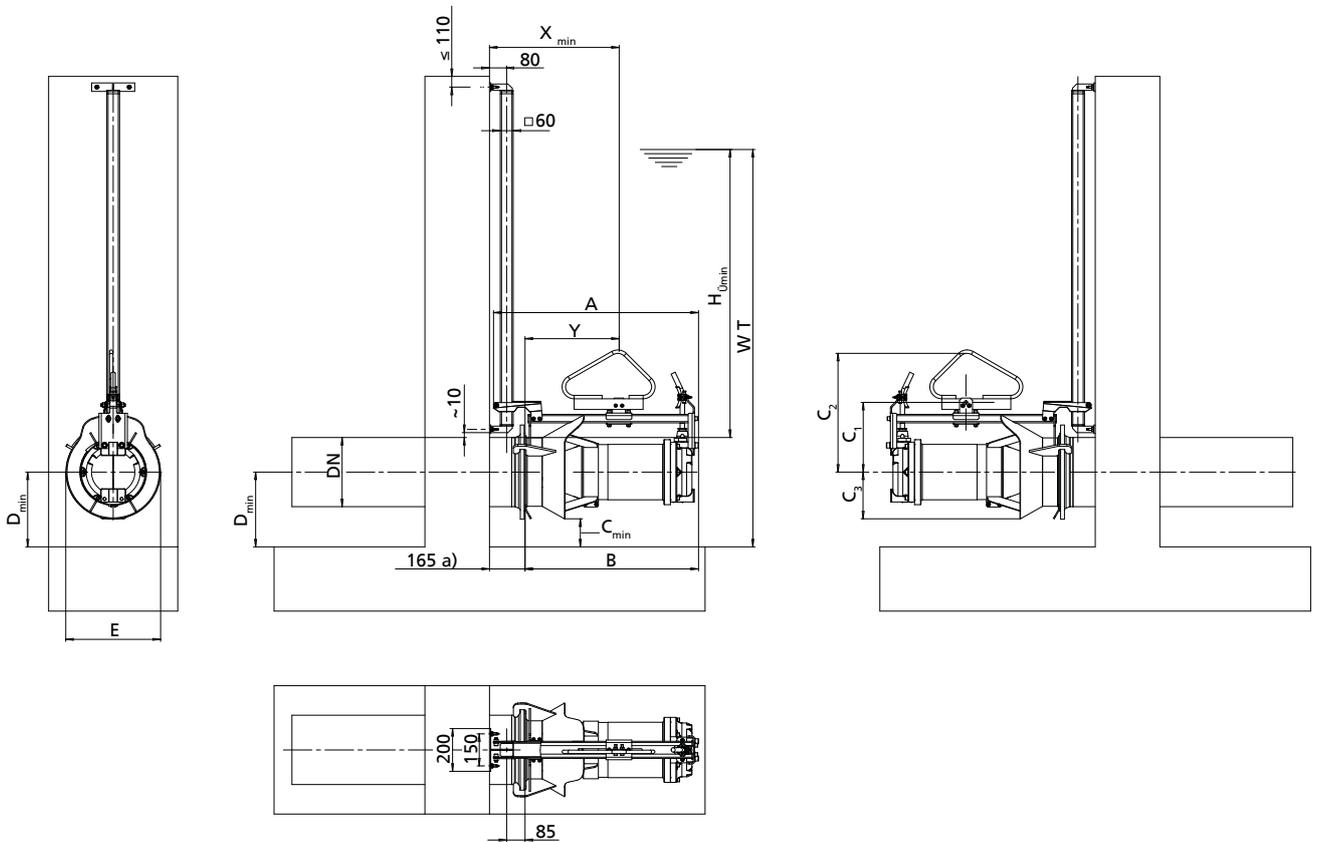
Dimensions of an Amaline 200, 300, 400; motor housing made of stainless steel
